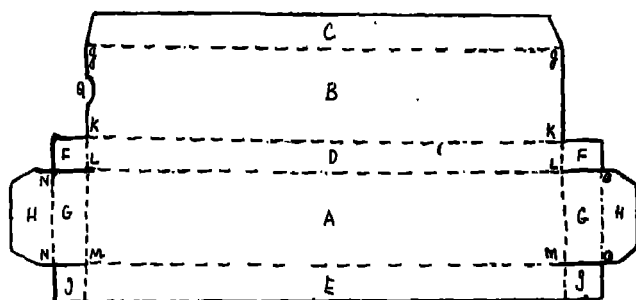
SINGLE-PIECE SIXPENNY CHOCOLATE PACKET.
